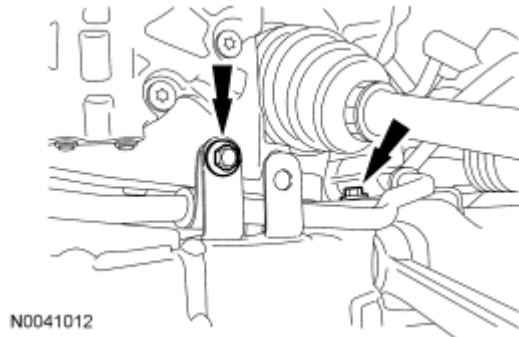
Locating LH Power Steering Tube Bracket Bolts
